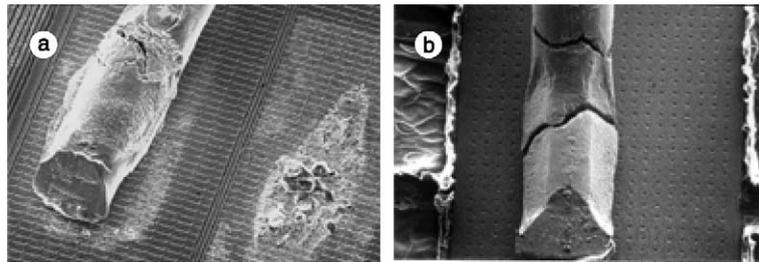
(a) Bond wire heel cracking due to low-cycle fatigue stressing (SEM image, 25×). (b) Bond wire cracking due to improper bond wire coating (SEM image, 25×).
